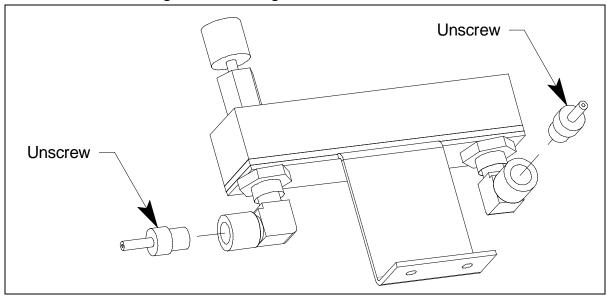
H₂S Dilution Sample Outermost Fitting Removal
